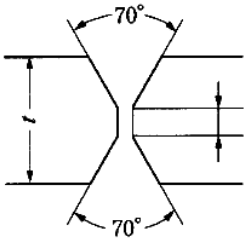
Edge Preparation of Butt Weld Test Assembly with Two-run Technique (Unit: *mm*, *t* = Plate thickness)
